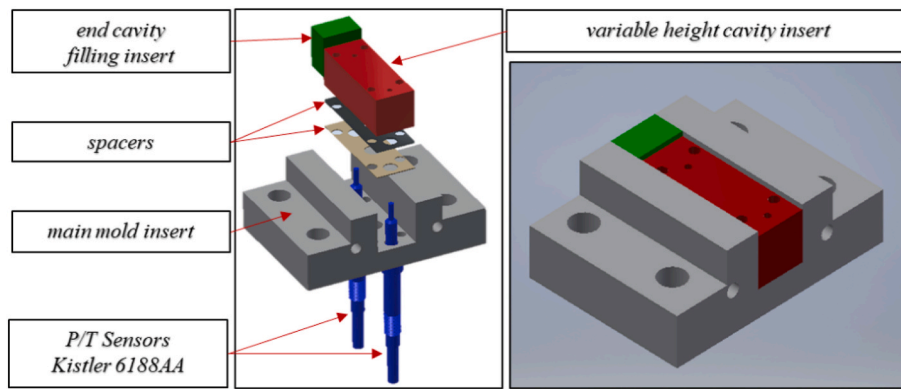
Exploded and assembled view of the insert for slit flow rheometer.
